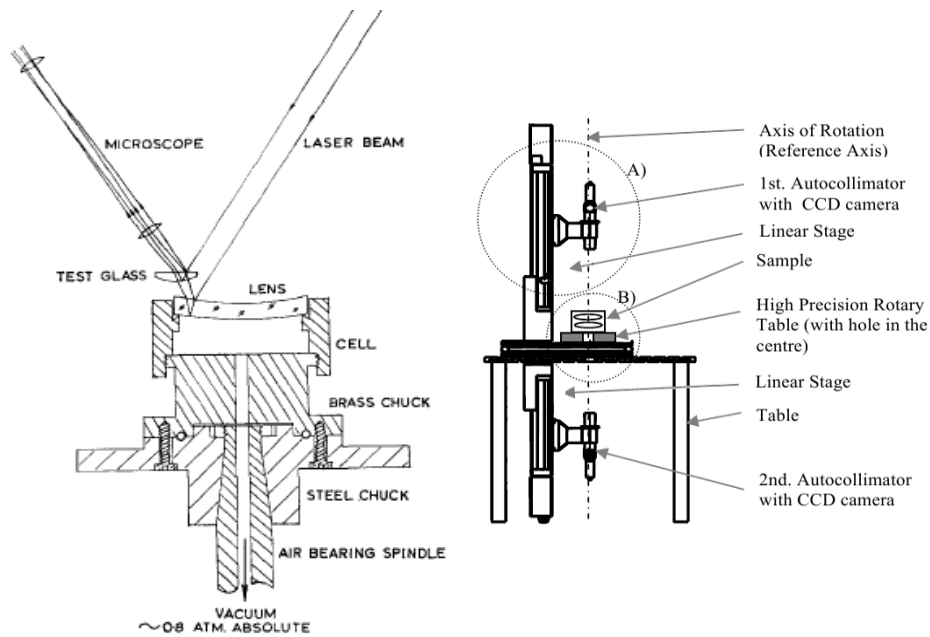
Alignment of optical elements with a rotary table. Left: using fringes from the two surfaces and a laser beam. Courtesy of [1.24]. Right: using a point source of light and an external positive lens. Courtesy of [1.25].
